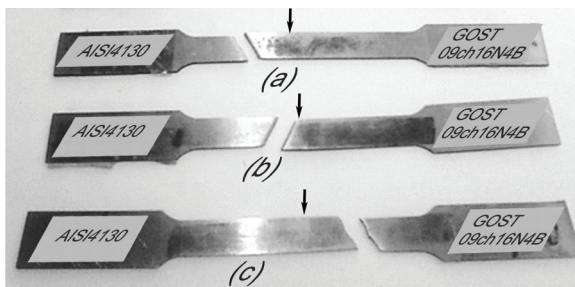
Fractured tensile samples (arrows indicate the weld metals): (a) L905, (b) M905 and (c) M904.
